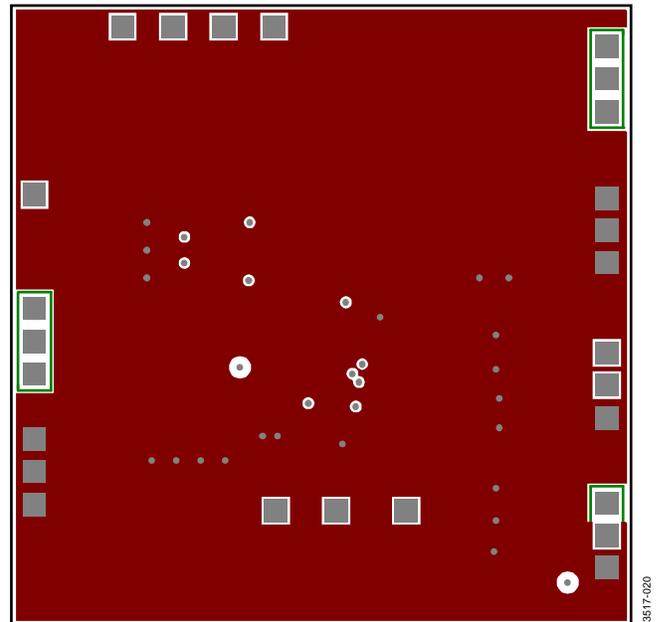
ADP1974 Evaluation Board PCB Inner Layer 1
